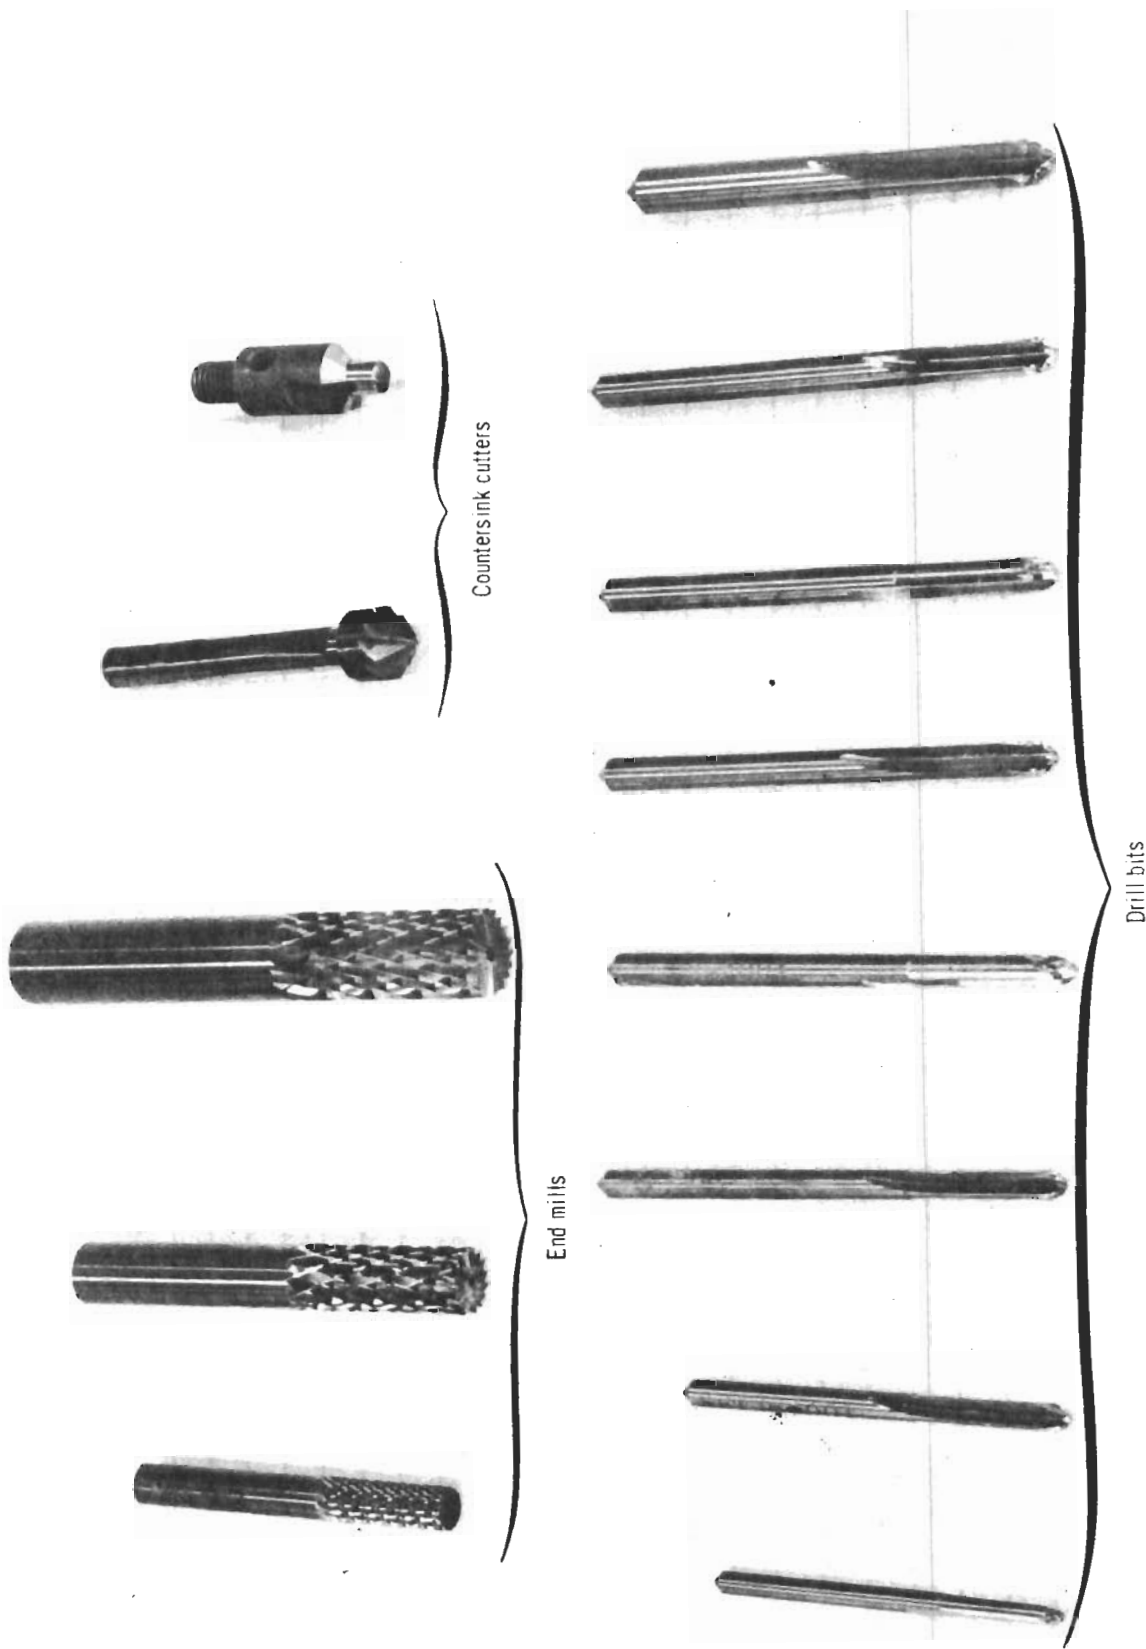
Tools Used to Machine, Drill and Countersink Beryllium
